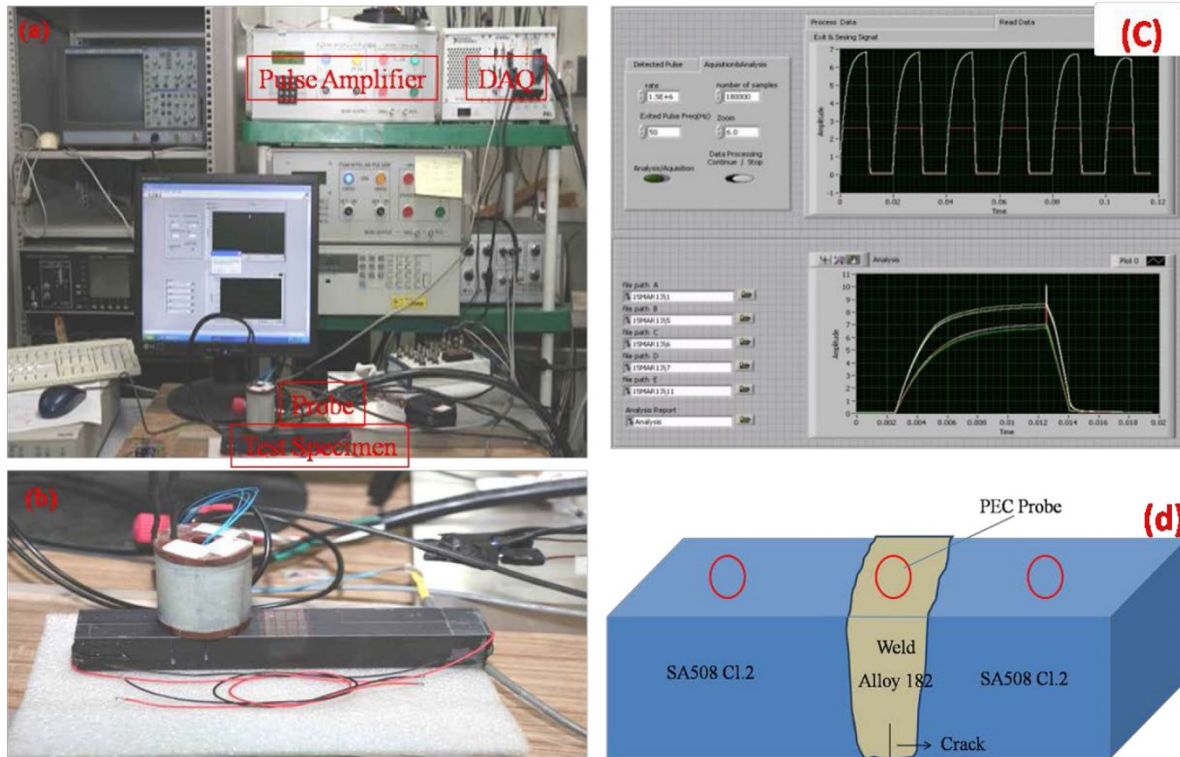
(a).Experimental Setup. (b) closed view of Probe and Test specimen. (c) Lab VIEW based application to read and process PEC data. (d) Schematic of PARENT Test Specimen, PECT probe is located on the opposite side of crack surface
